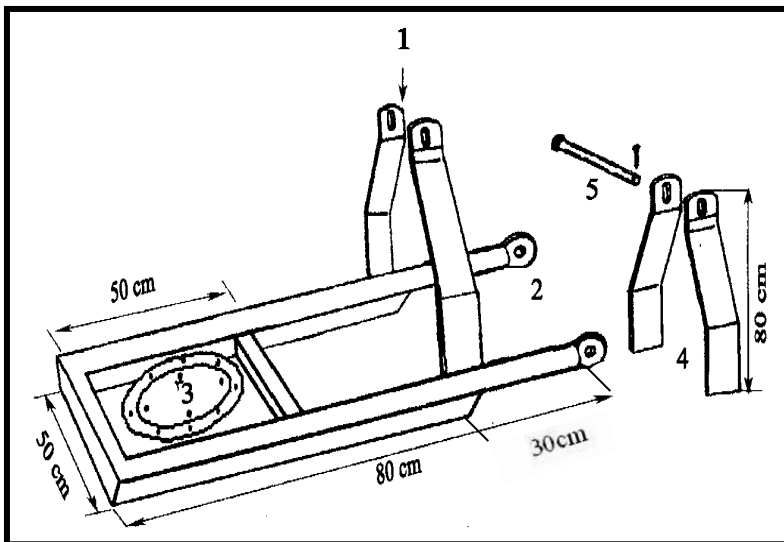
Turning machine direction and clasp device in compost upright turning machine
